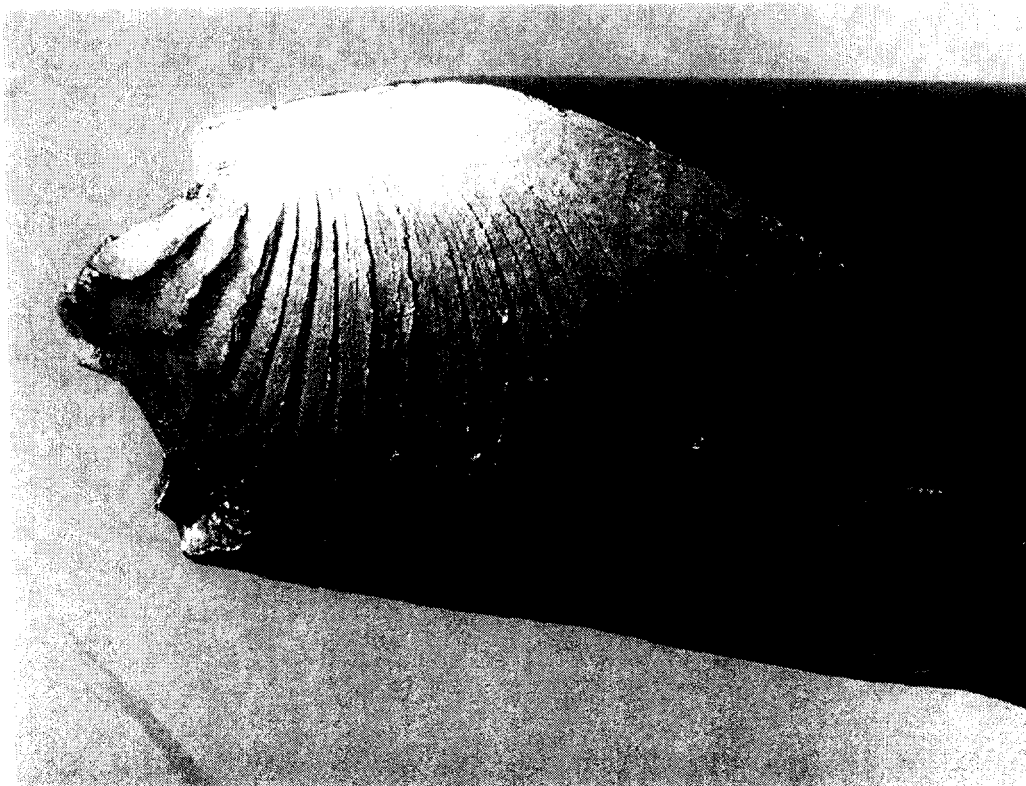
FRETTING TORSIONAL FATIGUE OF A SHAFT
